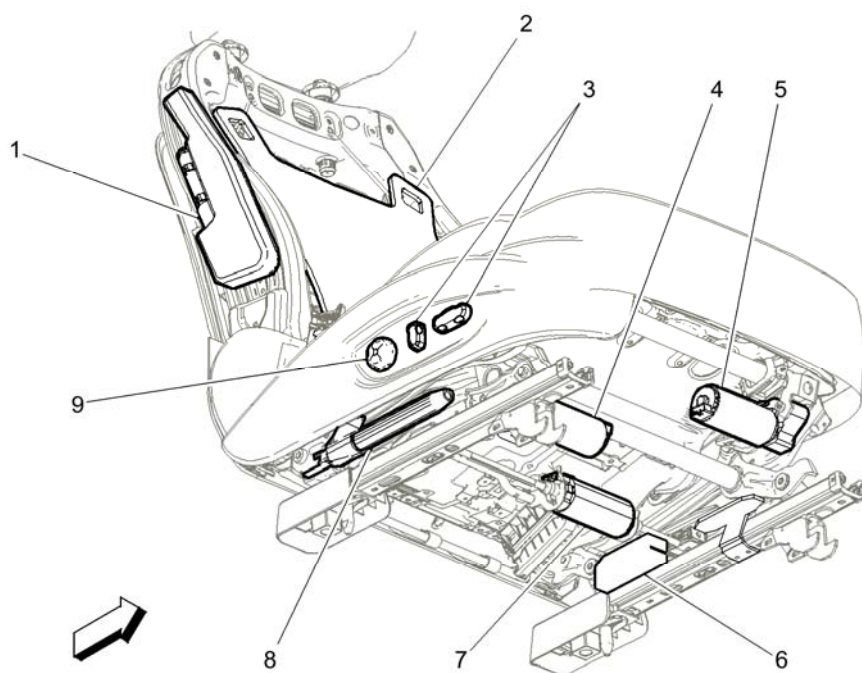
Bottom of Passenger Seat Component Locations (1 of 2)
